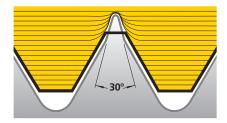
30° thread interferes in the nut thread, eliminating the tolerance and providing locking action.
